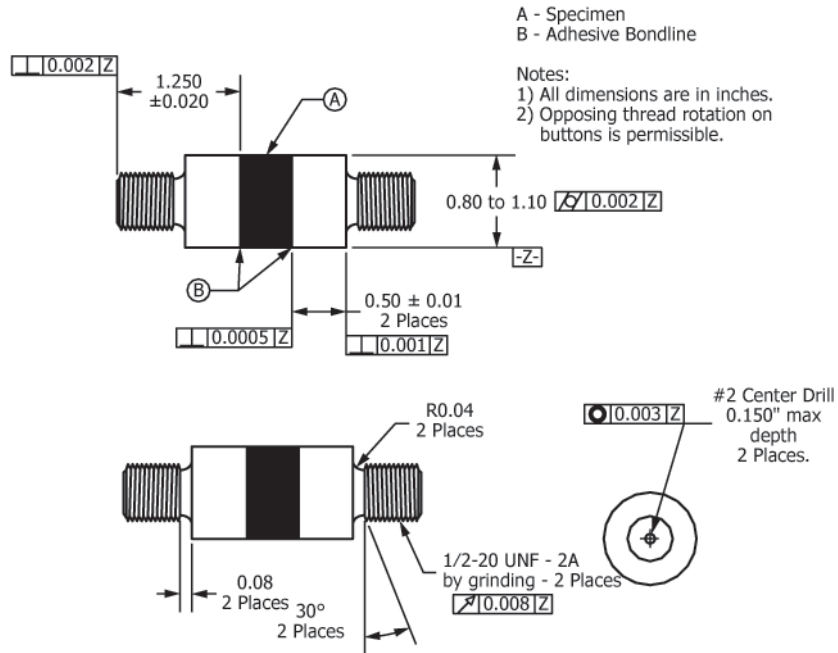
Drawing of End Tabs and Cylindrical Specimen Assembly (inch-pound units)
